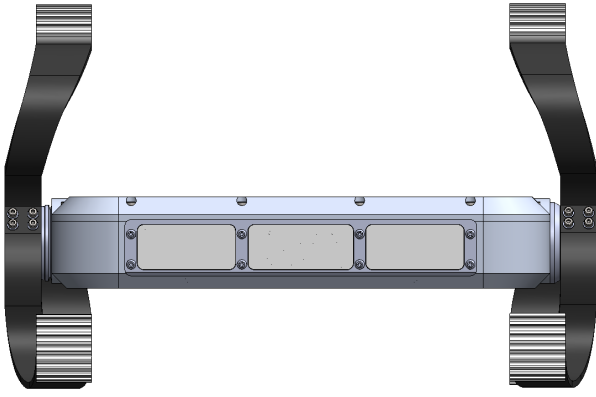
Front view of the SCOUT rover with redesigned 3D spokes
